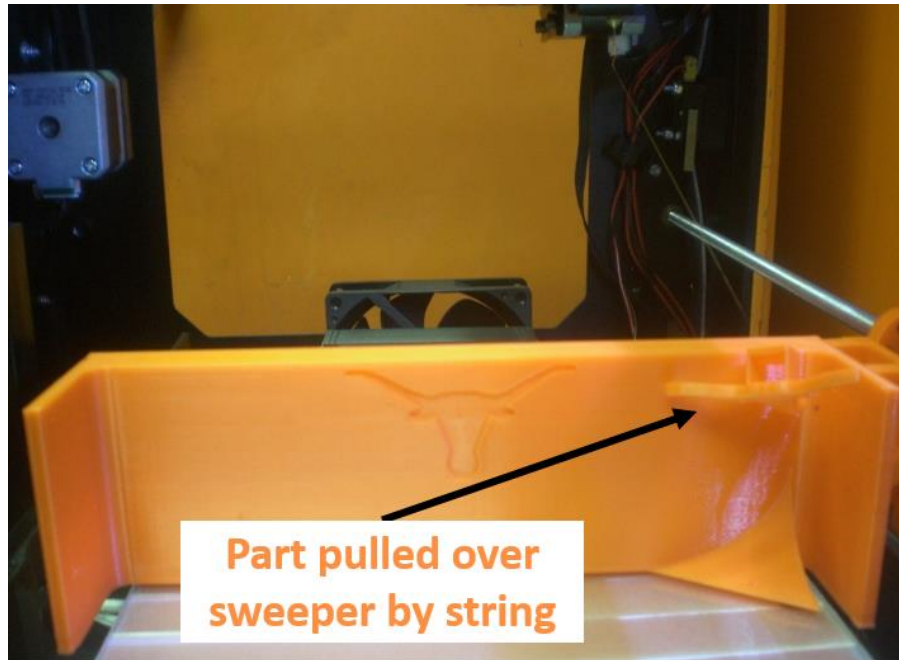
A small part attached to the printer head by a string of cooled plastic being pulled over the sweeper during a sweep cycle
